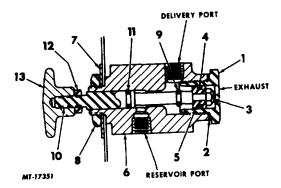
Sectional View of Type PB, Two-Way Control Valve
